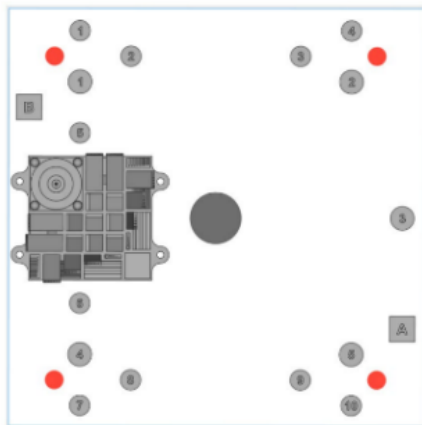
Example of JOB6 to JOB14 machine layout. Cylindrical samples are distributed on the plate together with rectangular samples (top left and bottom right), test cube (center left) and powder collection cone (center).
